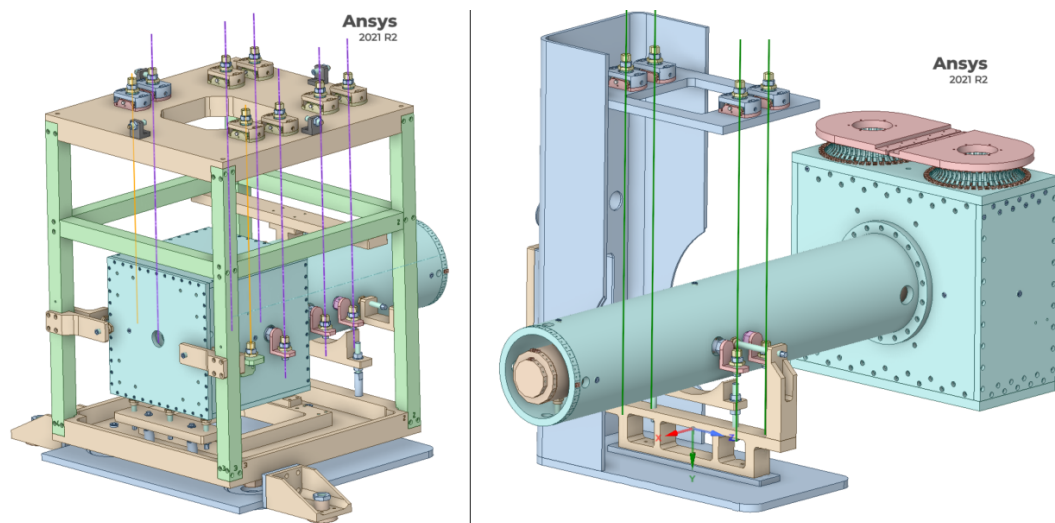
View side of the vacuum chambers. Left: test jig, a suspended platform surrounded by its thermal shield. Right: shield and cooling duct connected to the PTs' stages. The test jig chamber plays the role of a mini-cryostat to test cooling and vibration. The thermal connection between the two parts is the object of study in this thesis.
